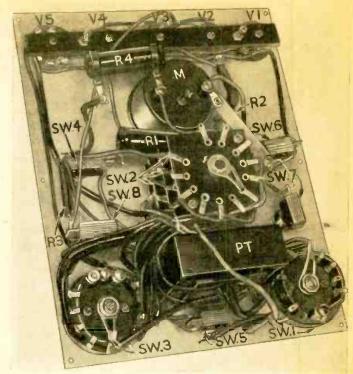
Fig. B. Rear view illustrating the location of the parts. See Fig. I.
